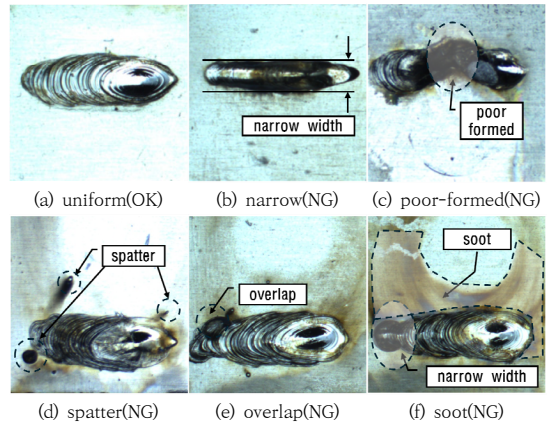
Various defect shapes encountered during the inspection of weld bead quality
